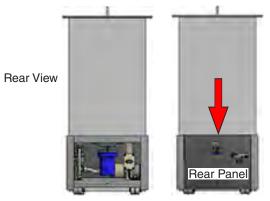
Install rear panel. Openings in panel fit over fluid and electrical connections.
